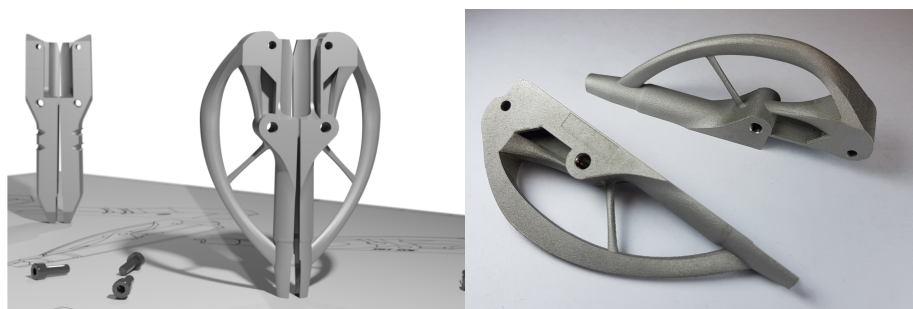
Conventional design of the screw gripper (left), optimized redesign (middle) and parts of the manufactured prototype (right).
